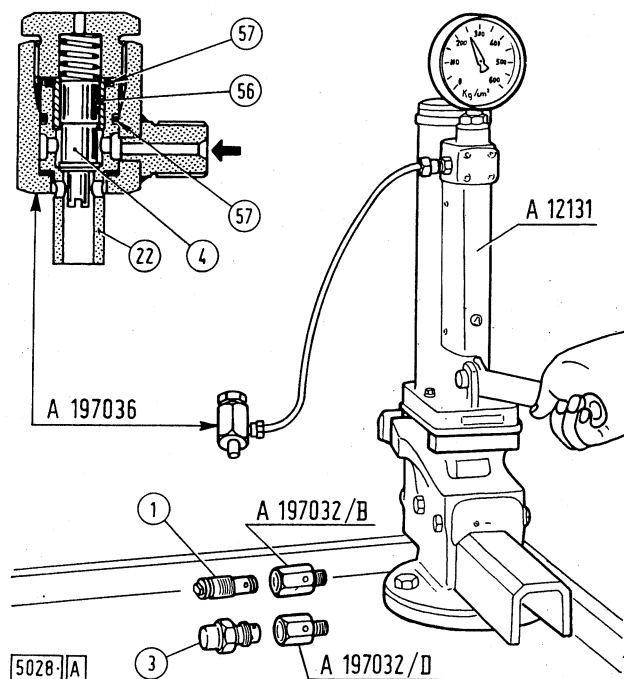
Test set-up for checking the calibration of the pressure relief valve (1), safety cylinder valve (3) and drain valve (4) sealing efficiency.
